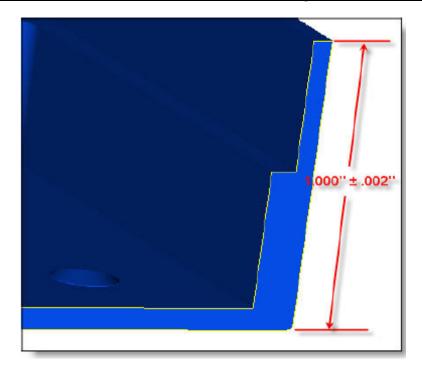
Faces on opposite side are more difficult to hold to tight tolerances, Source: Pro CNC Inc.
